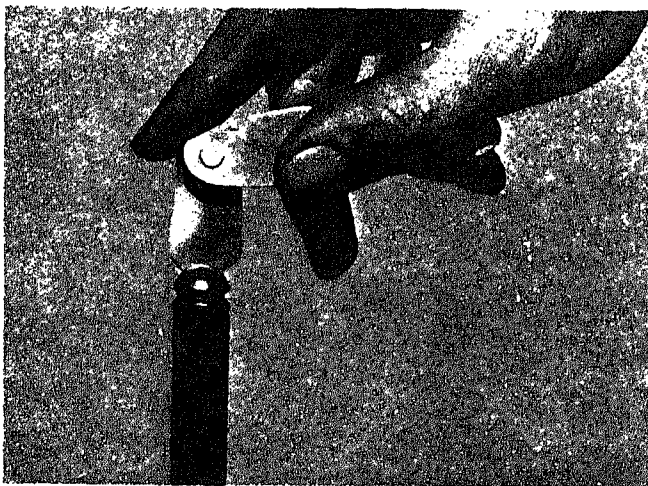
Checking push tube ball end with radius gauge N20309
